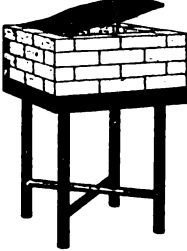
Fire brick furnace mounted on small welding table.
